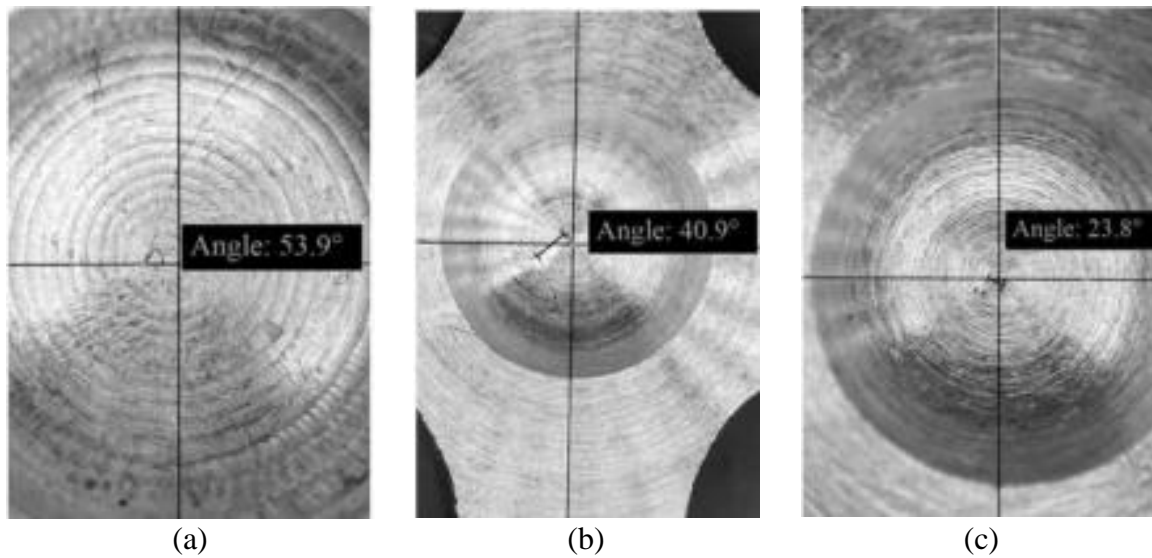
Specimen crack initiation angle:(a) T-T; (b) C-T 1; (c) C-T 2.
